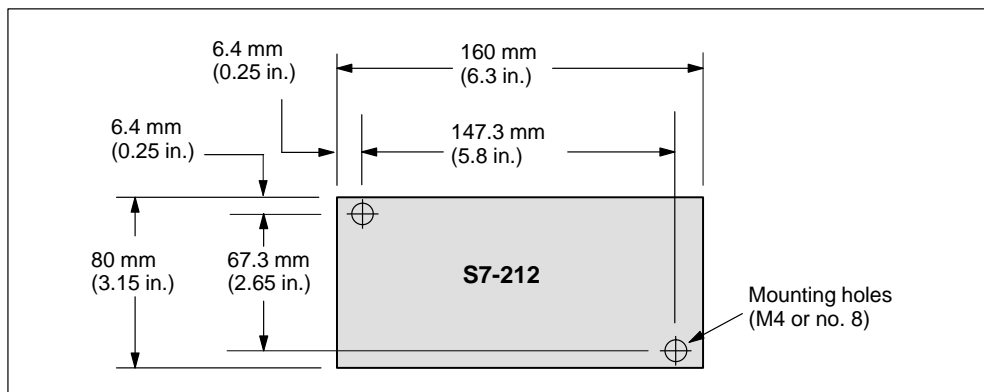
Mounting Dimensions for an S7-212 CPU Module
